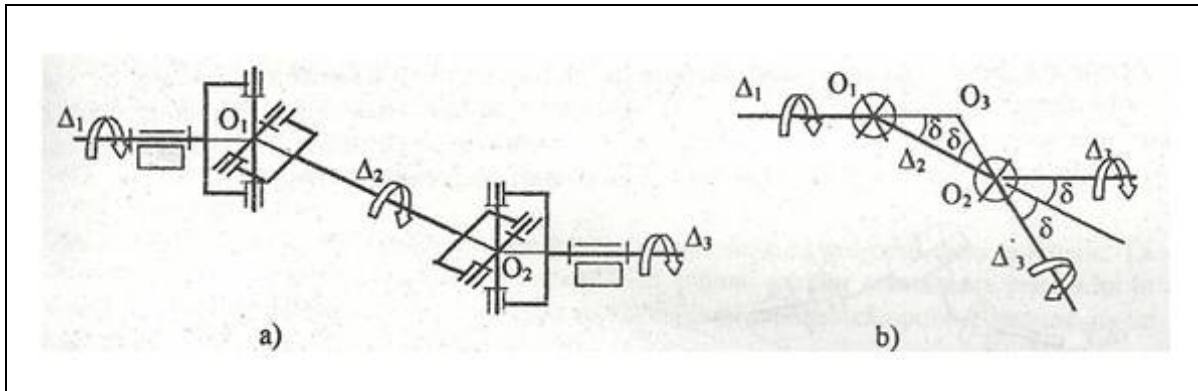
Cardan transmission (double cardan mechanism); the intermediate shaft is observed
